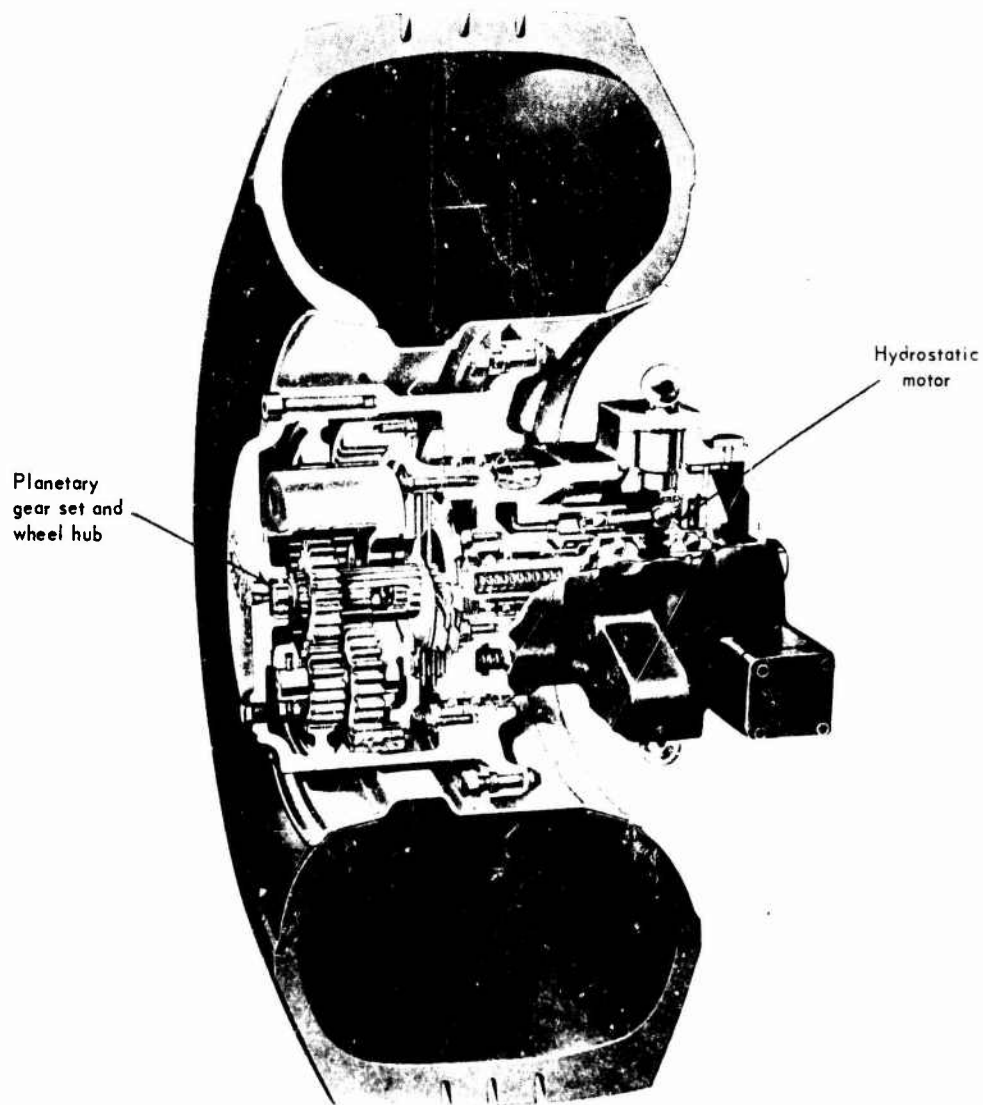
Typical Hydrostatic Wheel Drive Unit
